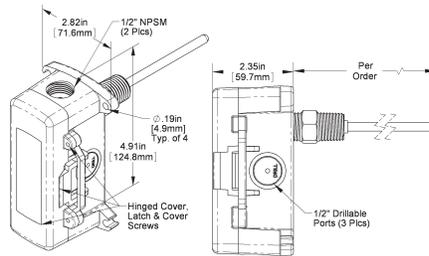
Double Threaded Immersion Sensor in a BAPI-Box 2 (BB2) Enclosure
